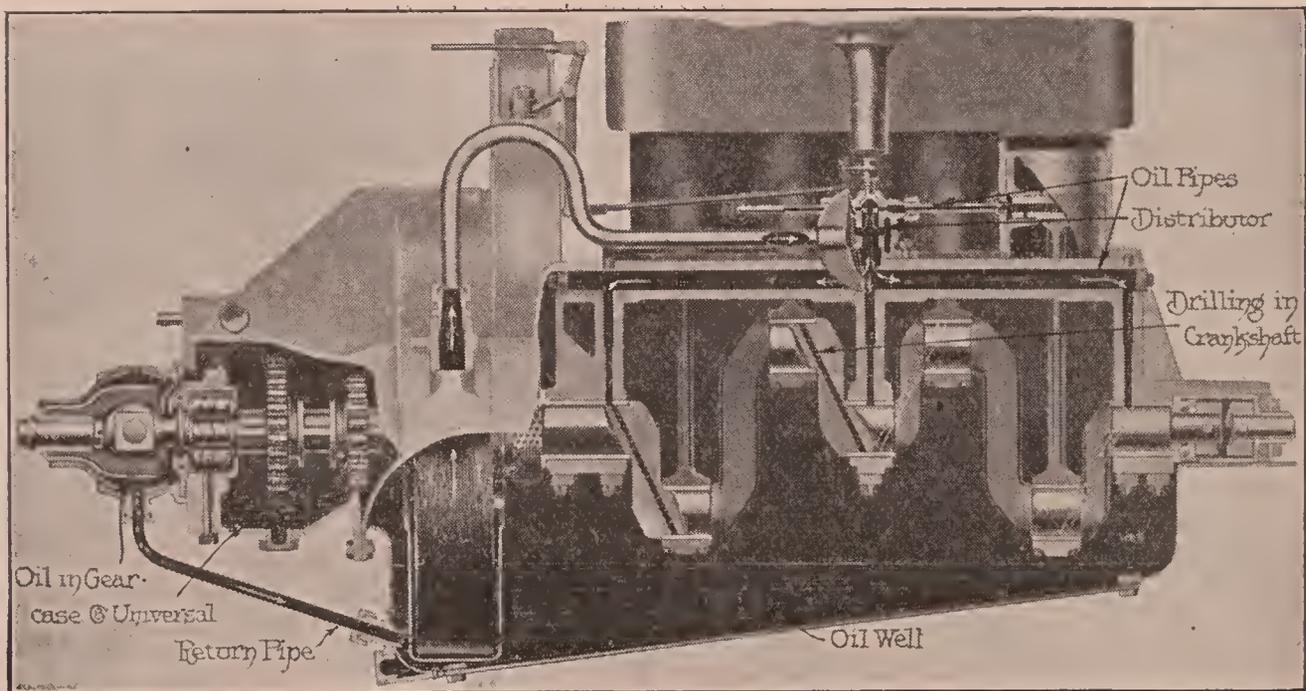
Side View of a Successful System of Lubrication in Which the Flywheel Really Circulates the Oil, Forcing It Into Various Pipes, Which Lead to the Different Bearings and Parts to Be Oiled.
